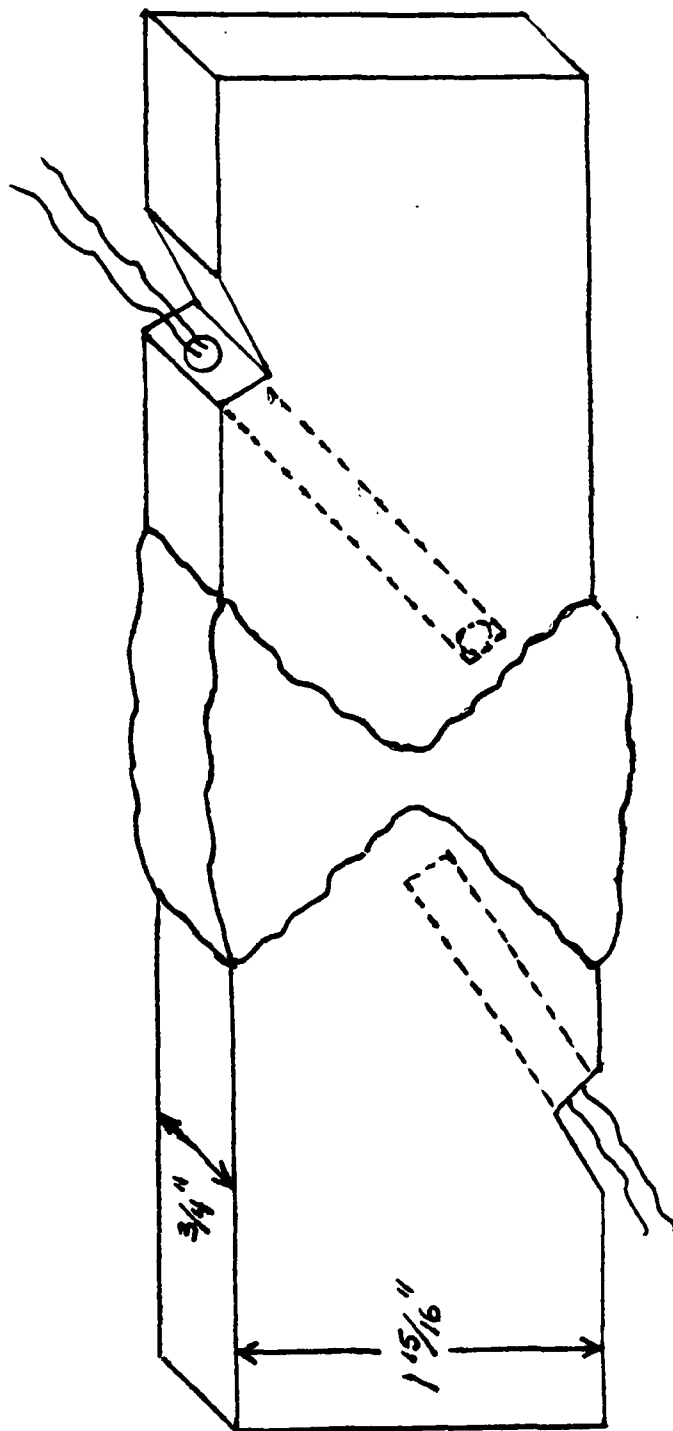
Macro sample of welded plate showing thermocouple placement.
